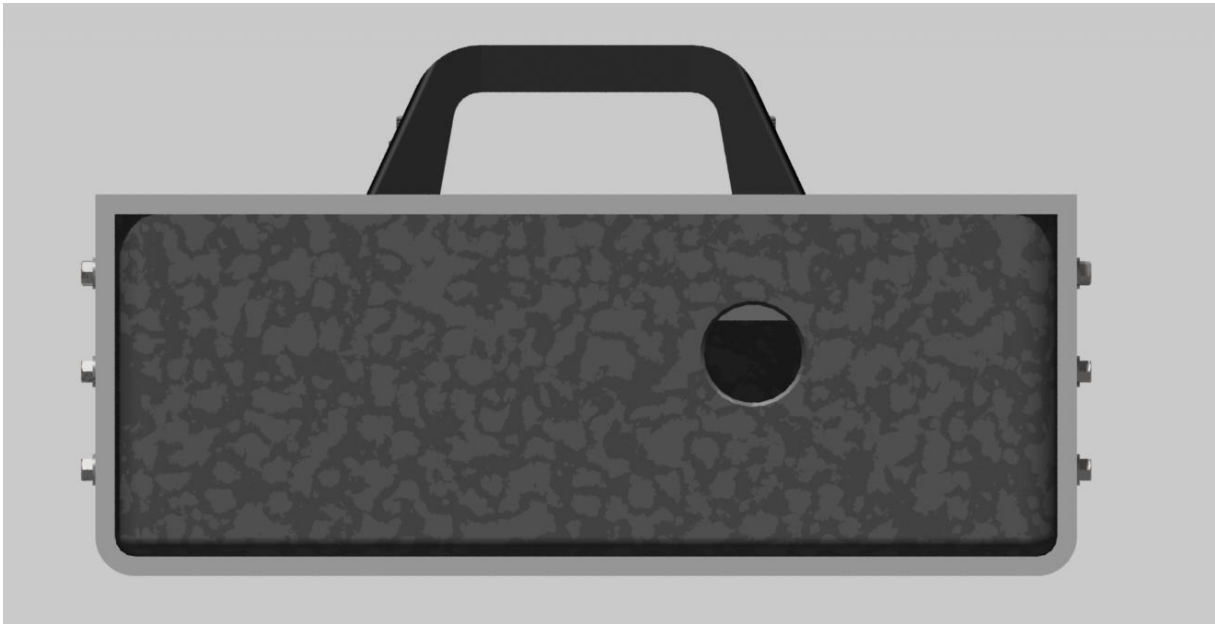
The front-view of the fully assembled ESS enclosure.
